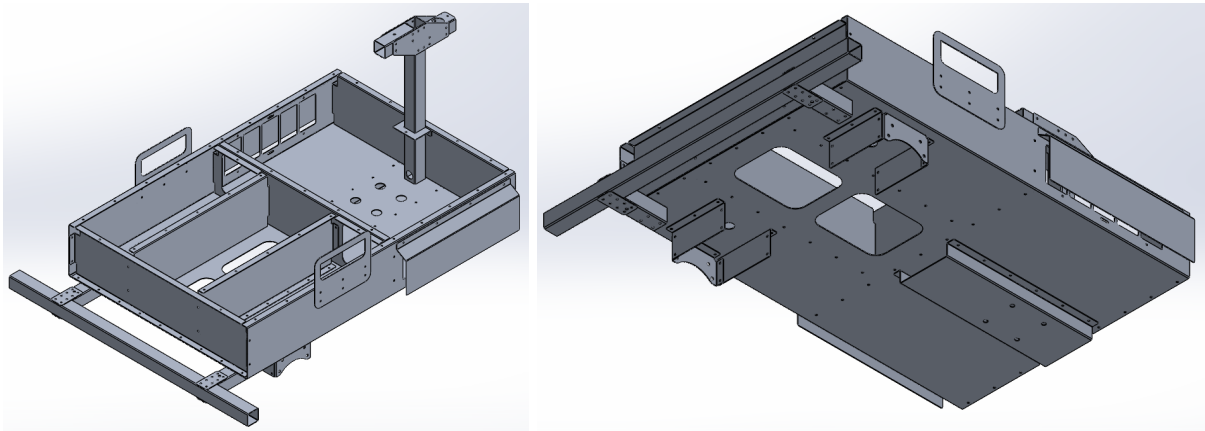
Top (left) and bottom (right) of the sheet aluminum chassis
